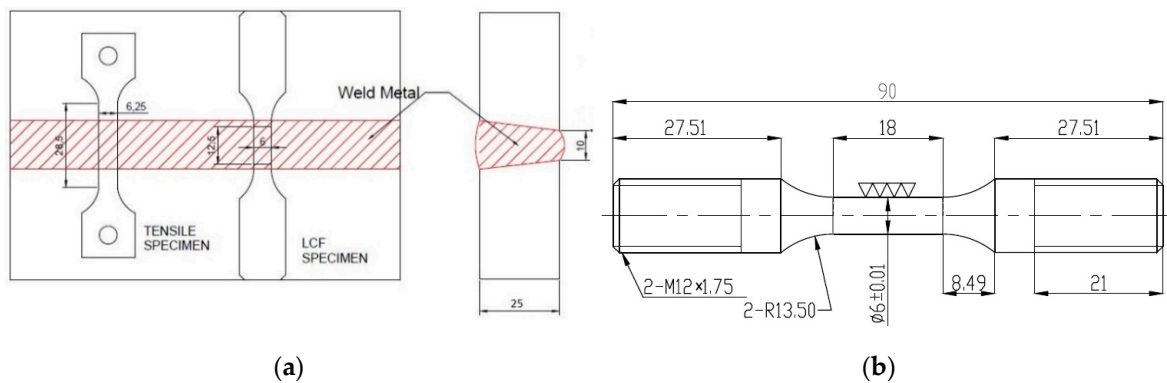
(a) The weld pad configuration of weldment specimens; (b) The cylindrical low cycle fatigue (LCF) specimen's shape and geometry.
